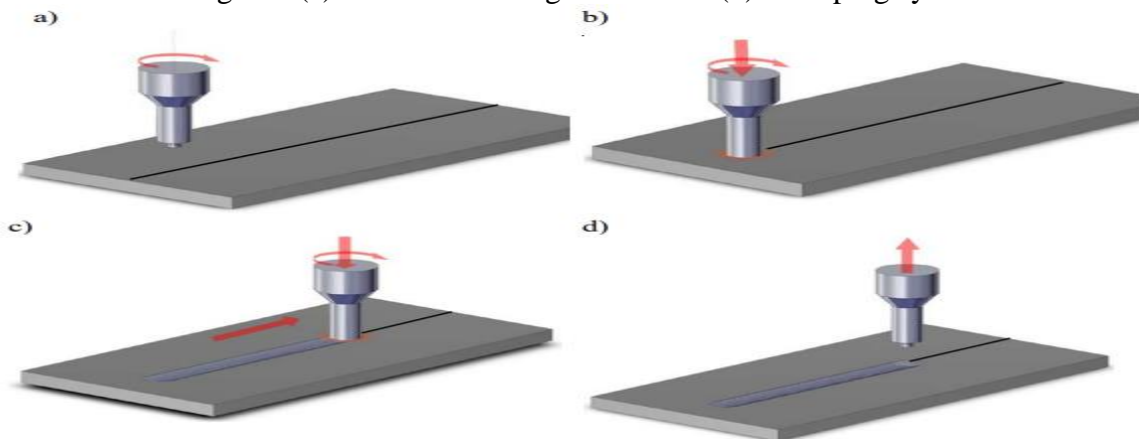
Four steps of the FSW including a) initial set up, b) tool plunging, c) traverse, d) tool withdrawal.
